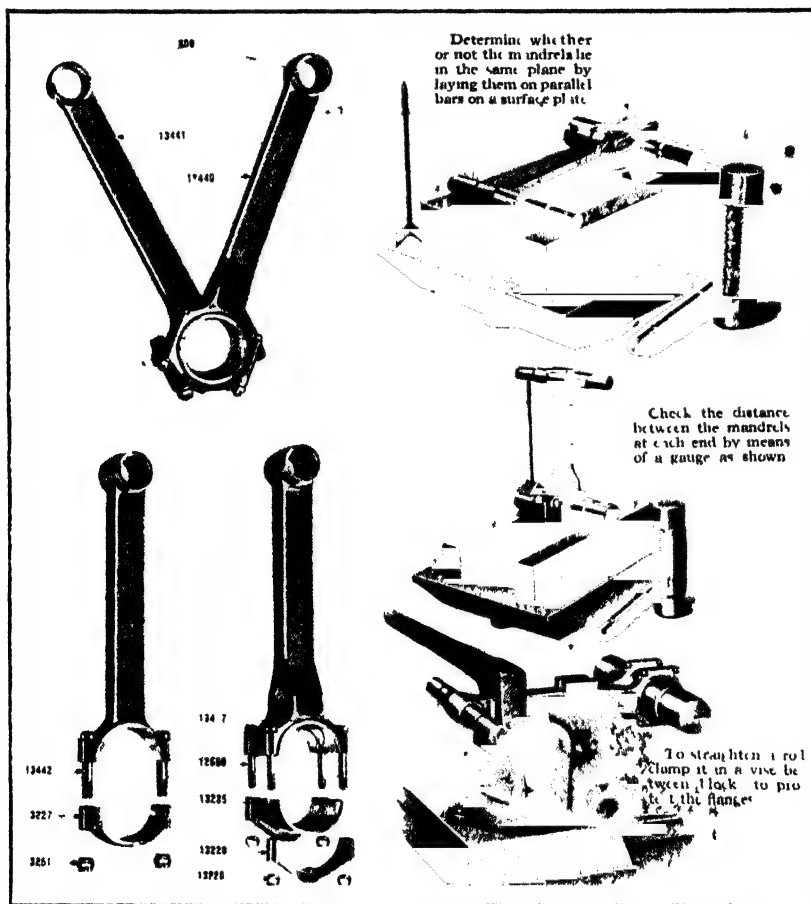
Liberty Connecting Rod Assembly and Methods of Checking for Alignment.
